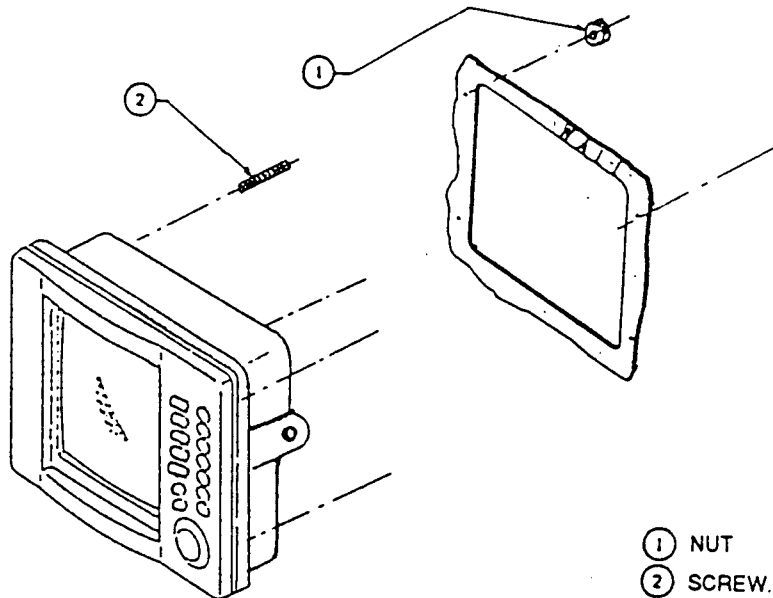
CONSOLE MOUNTING THE DISPLAY
